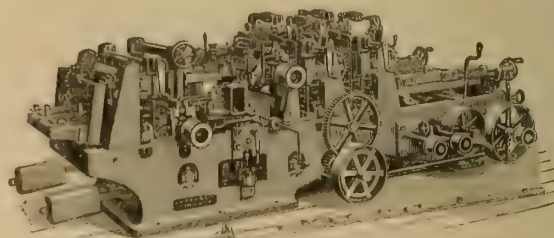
NO. 16. EXTRA HEAVY DOUBLE
